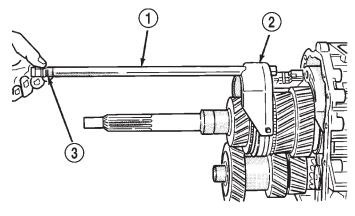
Removing Shift Shaft Lever And Bushing Roll Pin
